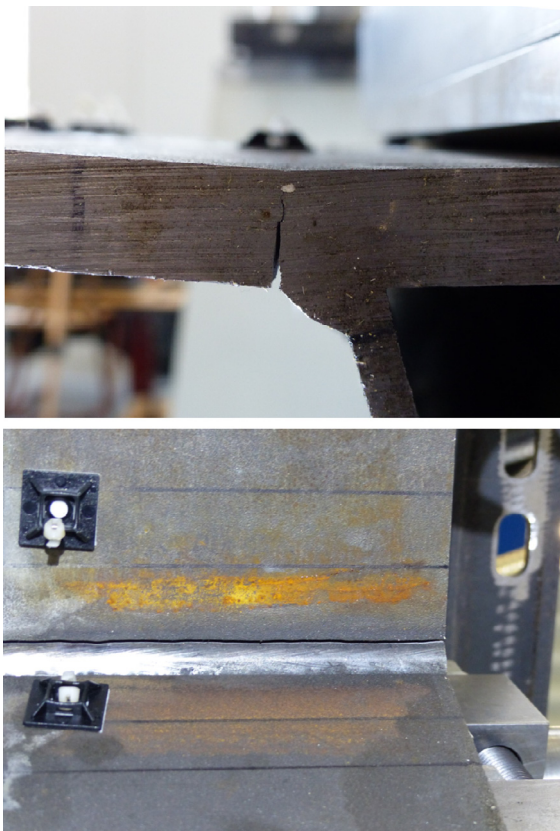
Fatigue crack at the weld toe (Specimen 7).
